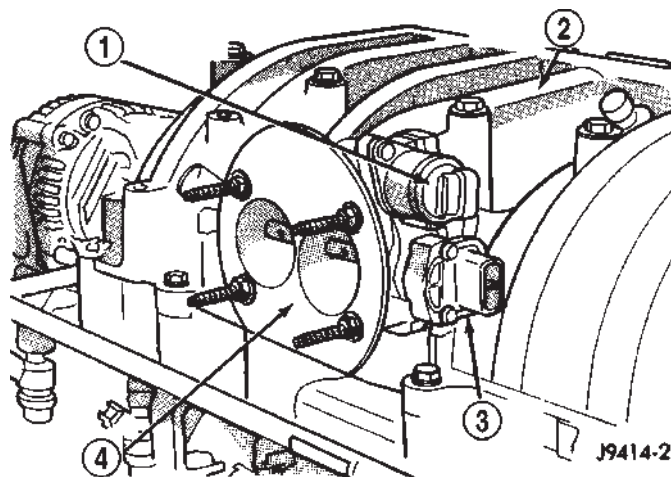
Mounting Bolts (Screws)—IAC Motor—3.9L/5.2L/5.9L Engines
